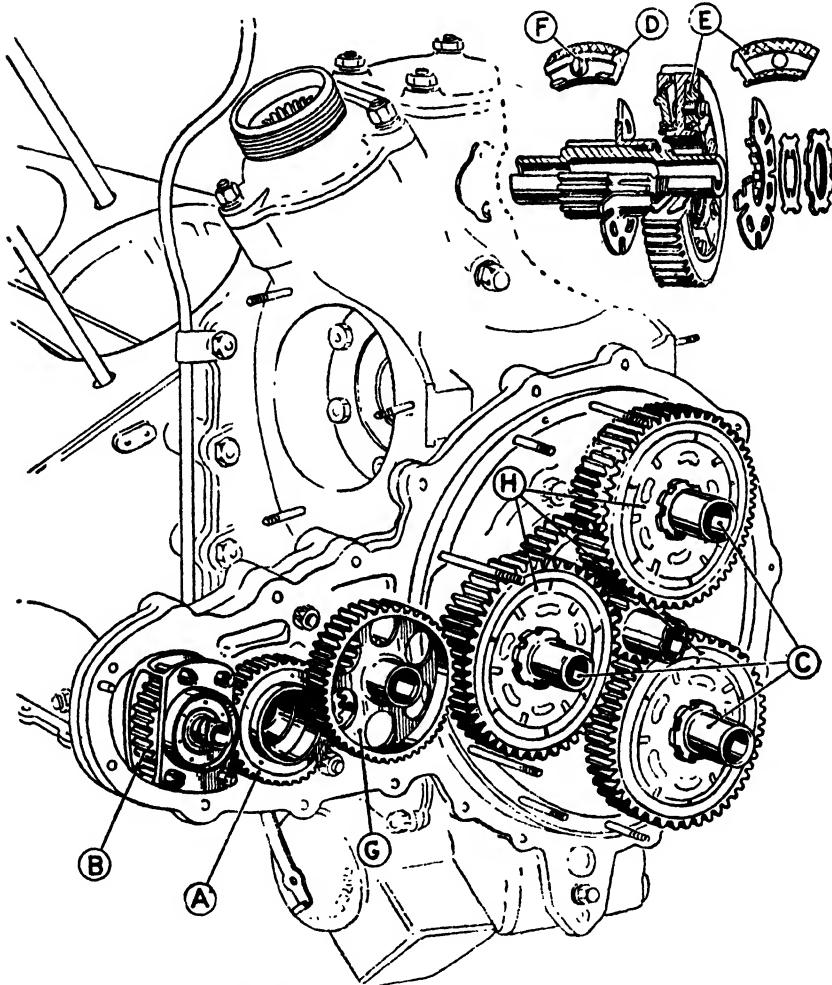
Supercharger and Generator Drive Gears with Casing Removed.
